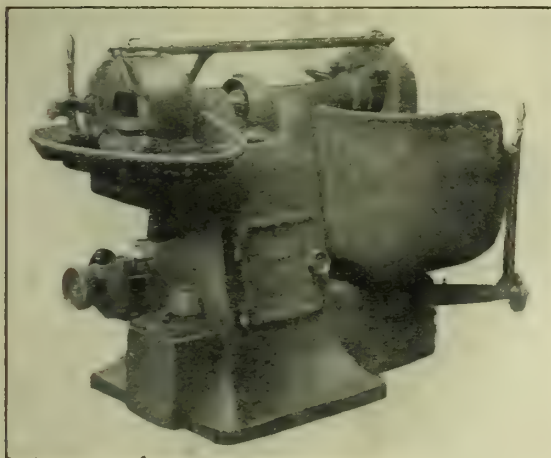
Lumsden Curved Lip Tool Grinder, No. 71 Machine.
